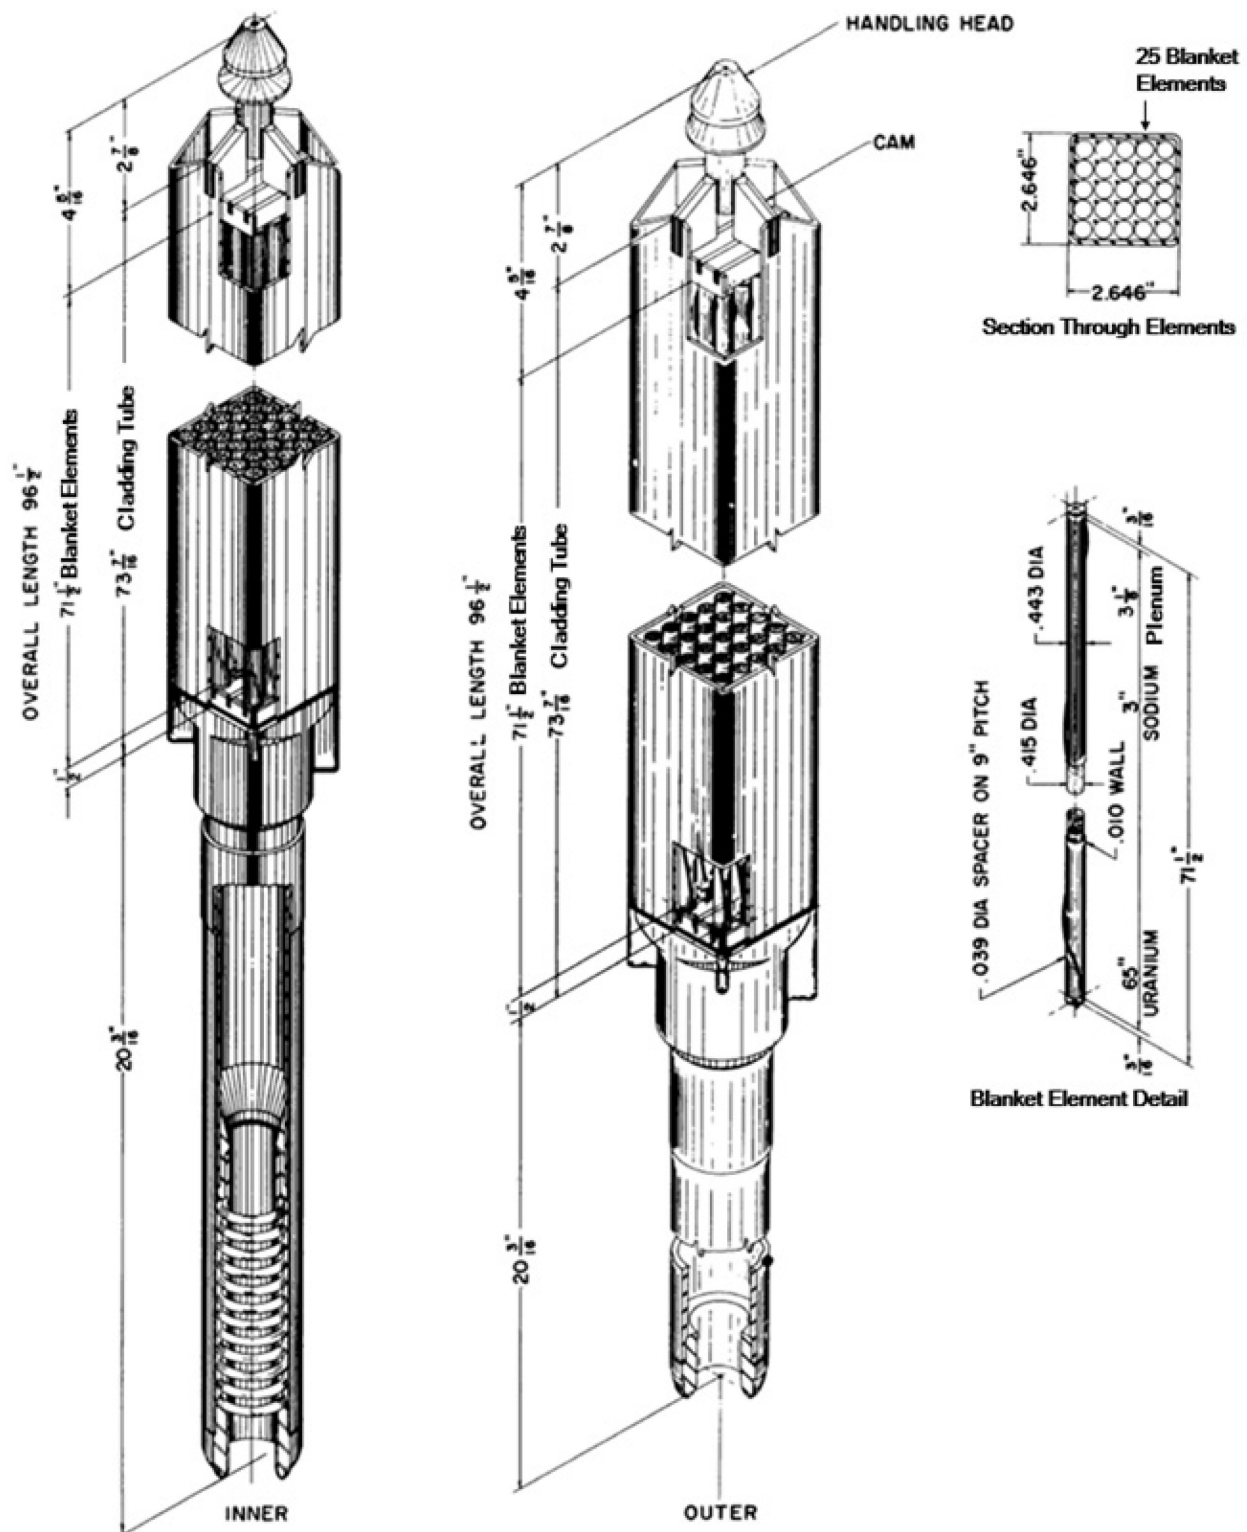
Inner and outer radial blanket assemblies used in the Fermi-1 reactor.
